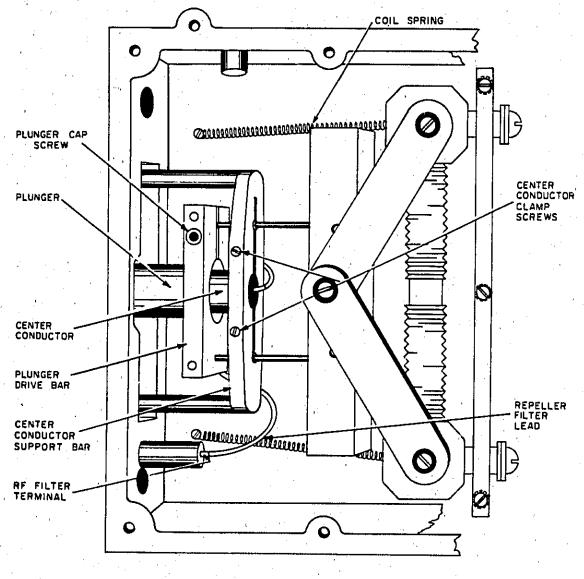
Frequency Drive Mechanism, Cover Plate Removed (620B)
